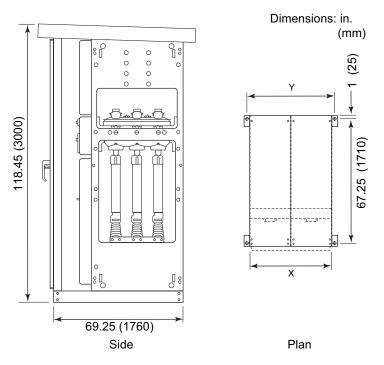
Side and Plan Drawing-Outdoor (Application A)
